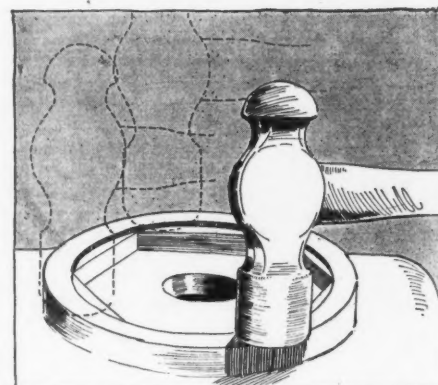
METHOD OF LOOSENING CYLINDER PLUG
